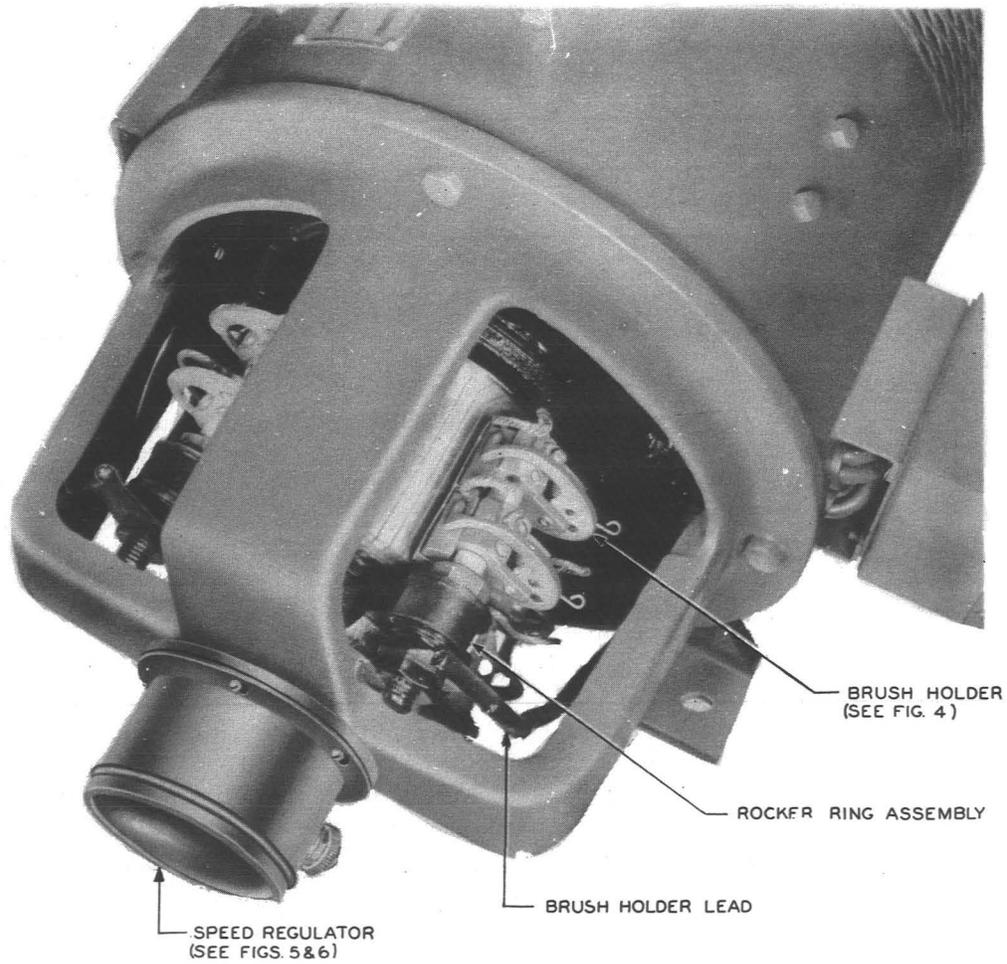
DC Motor End Charging Set (Equipped With Speed Regulator)
